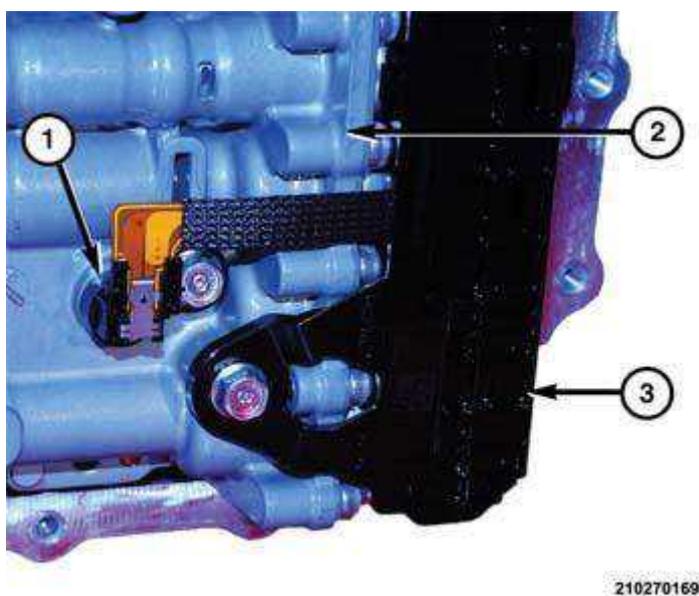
Fluid Temperature Sensor, Valve Body & Bolt
